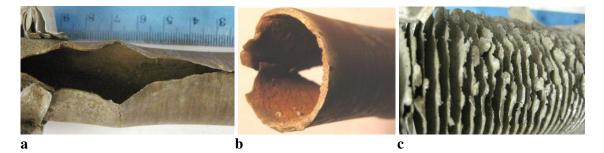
a, b Ruptured carbon steel tube in the fin-fan air cooler at the overhead of aromatic tower. c Corroded aluminum fins
